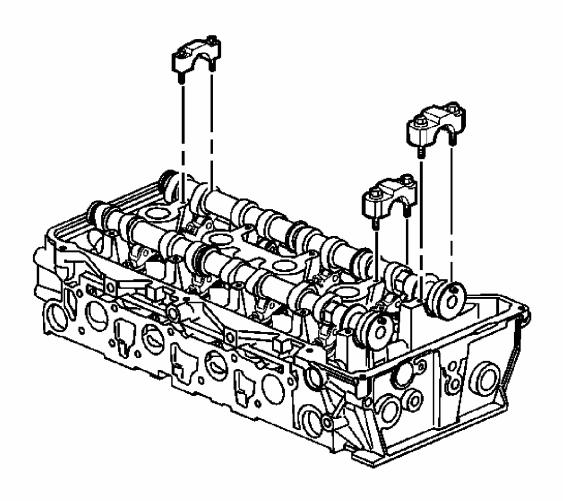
View Of Camshaft Bearing Caps Courtesy of GENERAL MOTORS CORP.
